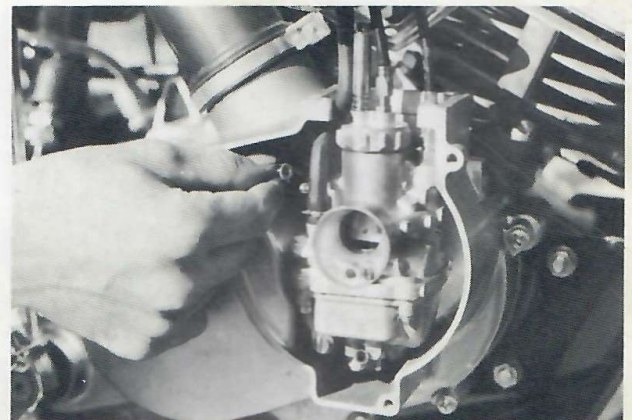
Disconnecting fuel line vacuum tube and over flow pipe
